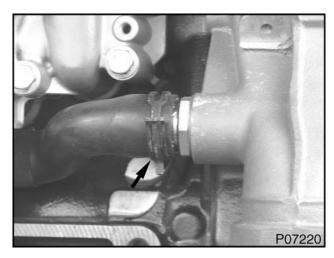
Charge Air Cooler (CAC) return coolant pipe
